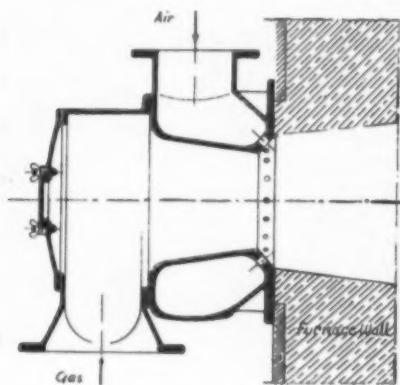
Sectional drawing of the "Basequip K" patent gas burner.
